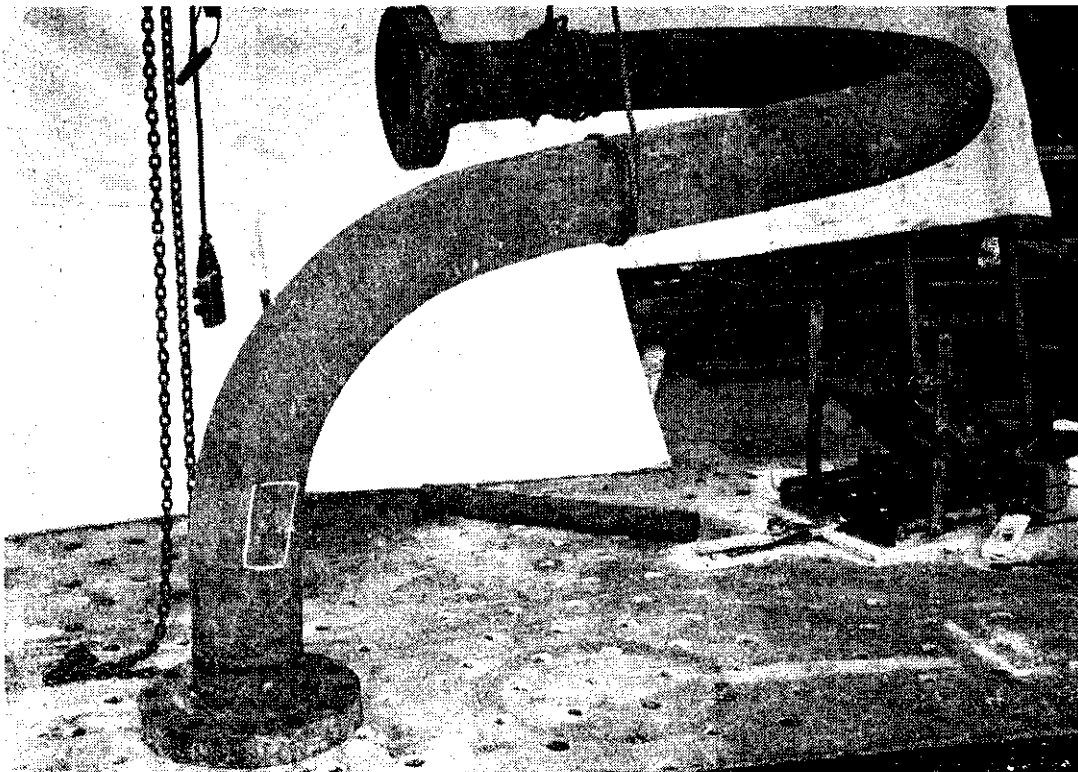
DEFECTIVE STEAM PIPE SHOWING LOCATION OF CRACKING
